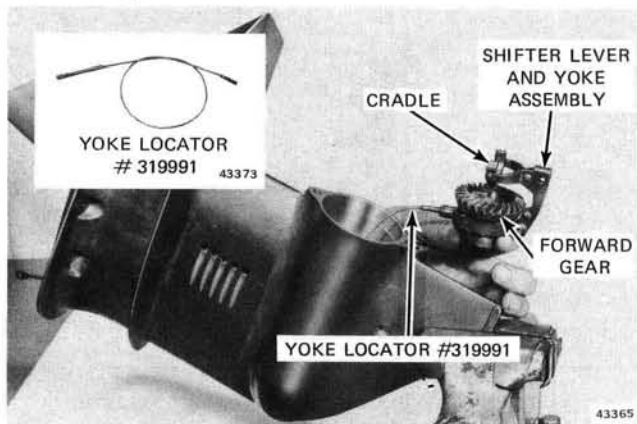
Installing Shifter Lever and Yoke Assembly
